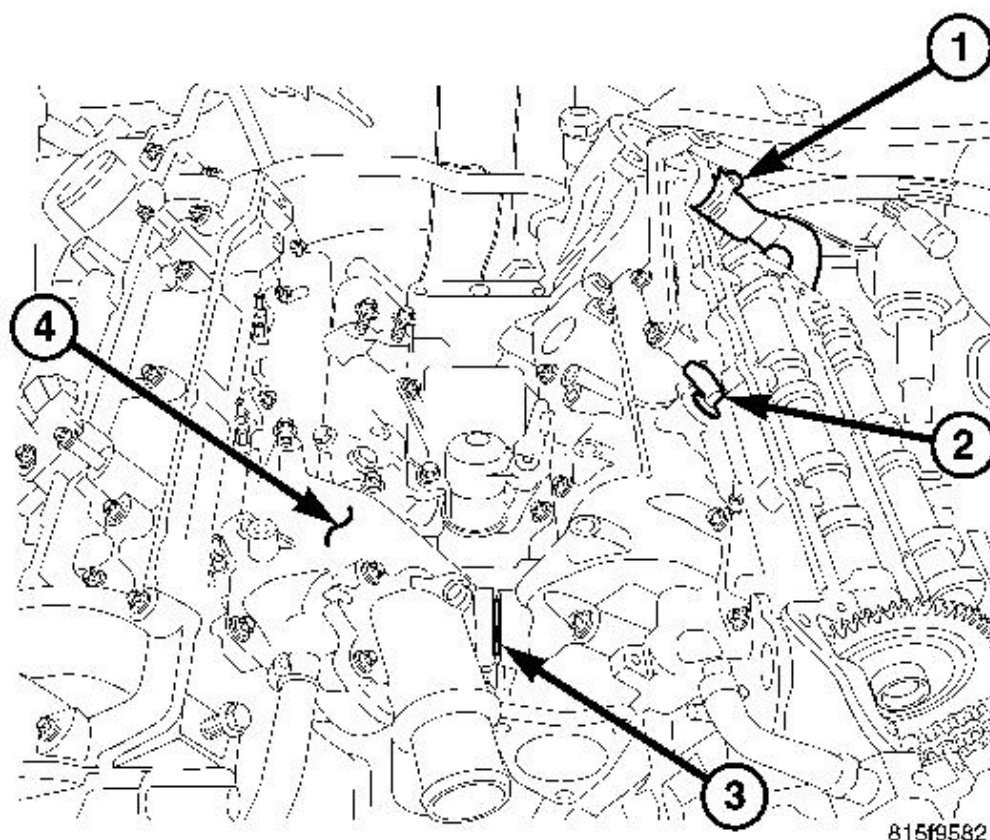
EGR Coolant Pipe, Coolant Temperature Sensor, Intake Coolant Passage & Intake Manifold
